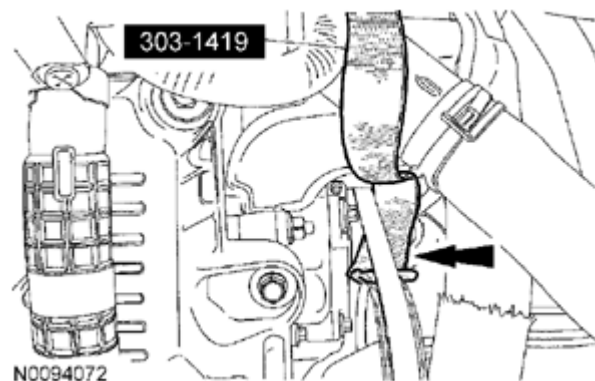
Positioning Stretchy Belt Remover Under Coolant Pump Belt
